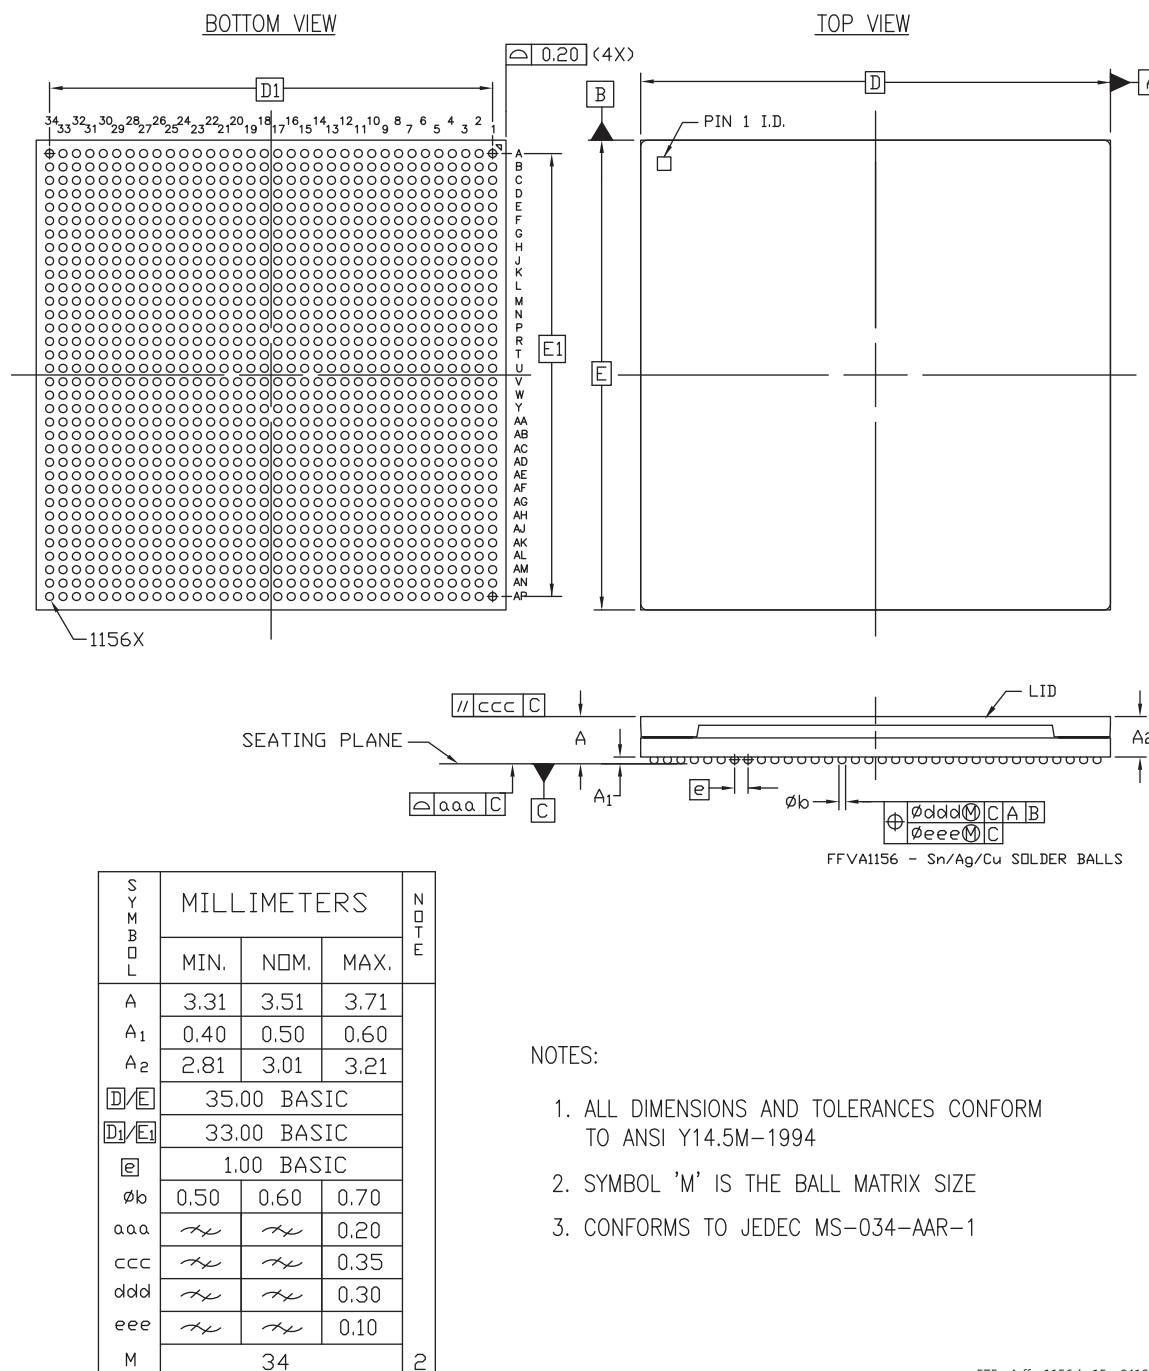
Package Dimensions for FFVA1156 (XCKU15P)
